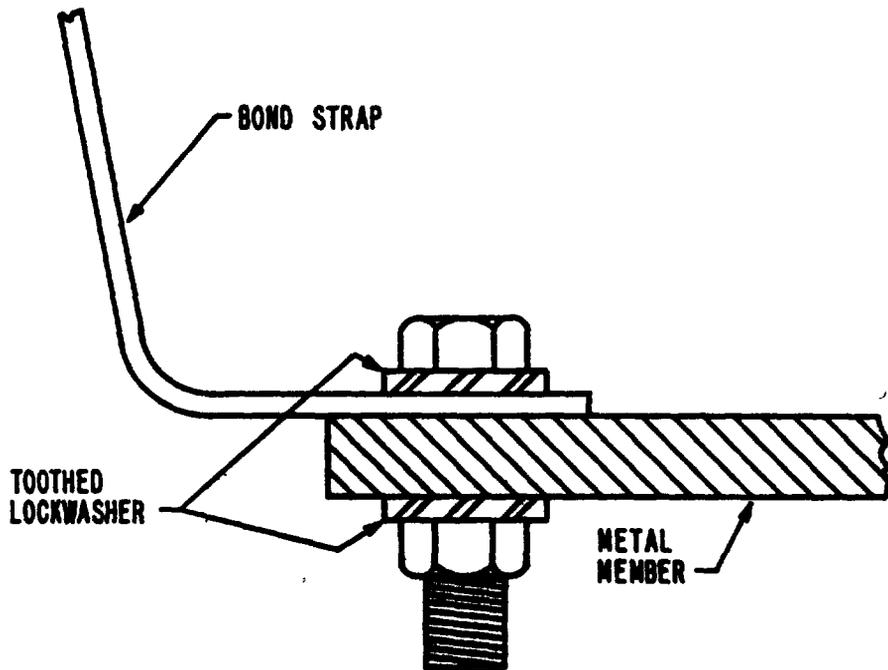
RECOMMENDED BOND STRAP BOLTING INSTALLATION
